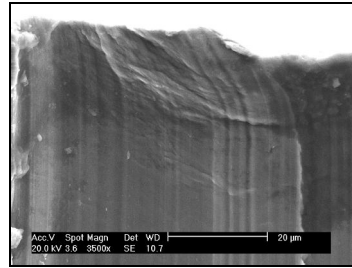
Cross section of the machined sample. Cutting speed (v_c) is 60m/min, feed per teeth (f_z) is 0,08 mm/teeth and axial rake angle is 45°.
